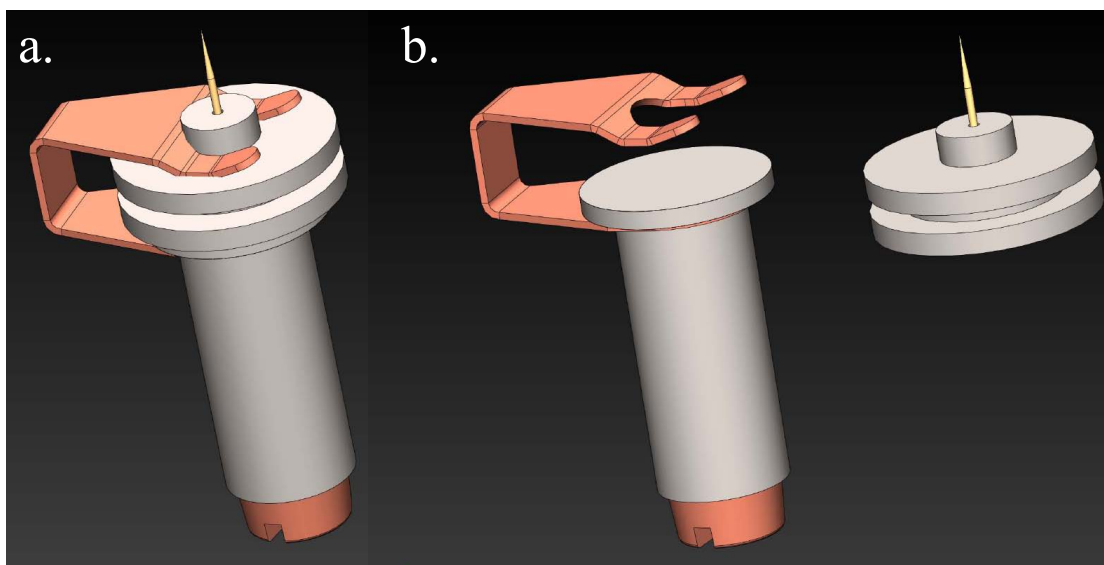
a. 3D model of the new tip-holder. It consists of a fixed part made of two Ti components screwed into each other, a Ti screw that holds the tunnel current contact, and a CuBe spring. This spring holds the mobile tip-holder, made of Ti as well, and allows for its insertion and extraction using lateral force only. b. Same model with the mobile tip-holder out of the fixed part.
